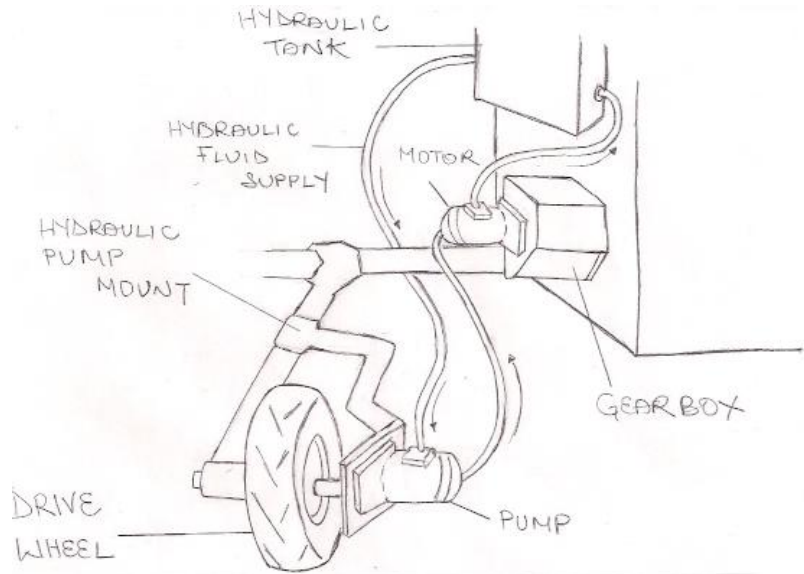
Metering wheel-driven pump with hydraulic motor design diagram.
